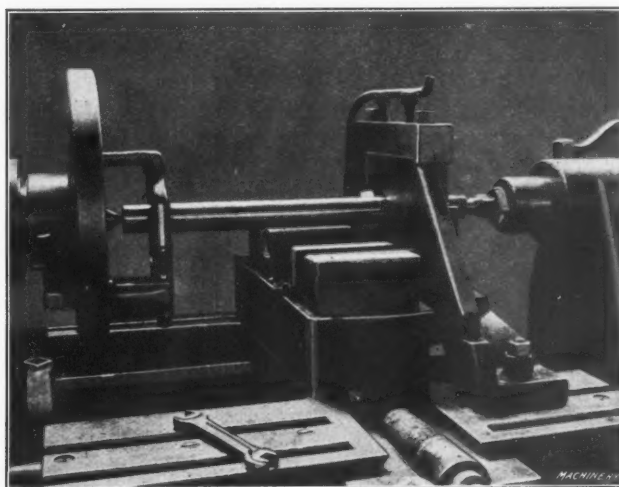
Method of boring Follow-rest to insure Hole being Concentric with Lathe Centers
